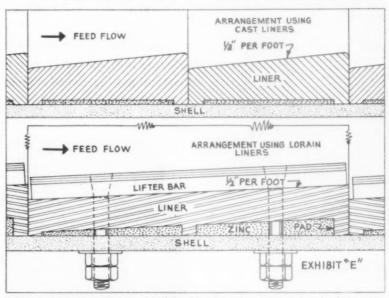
Exhibit E: Sketch of installations of ball-classifying liner plates using cast and rolled sections
